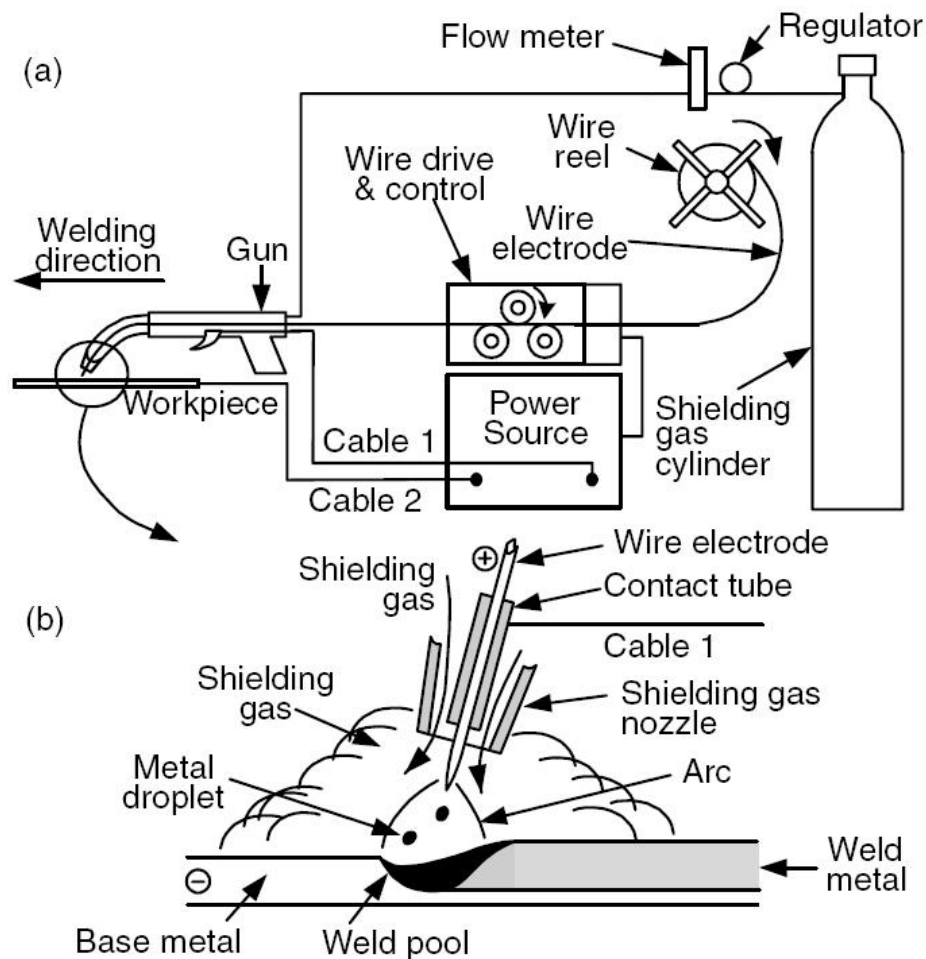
Gas Metal Arc Welding Process a) Overall Process and b) Welding area [6]
